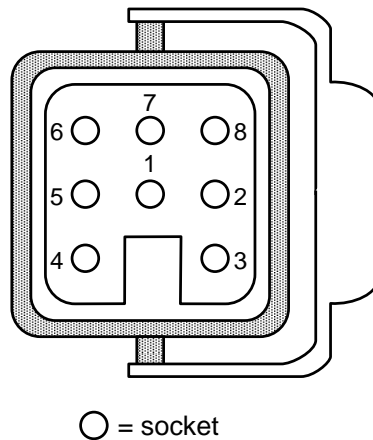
Plug on the injection moulding machine and on the peripheral equipment
